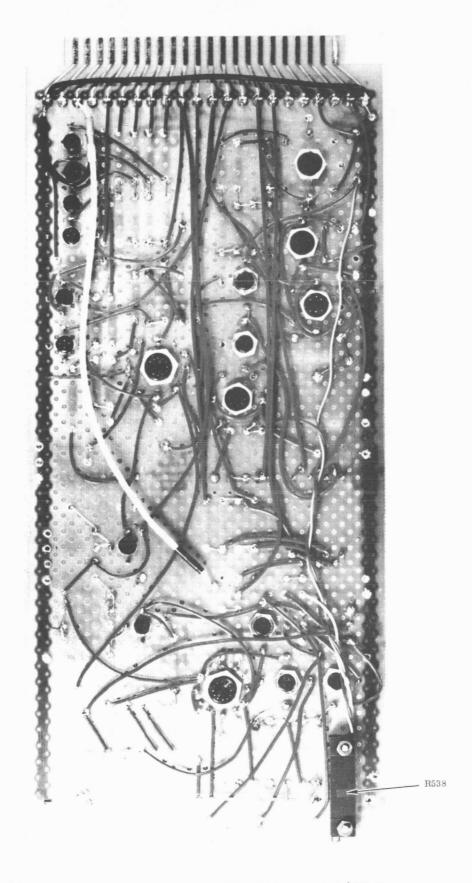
Bottom View Board 5 RF, Video and A/PW Converter
